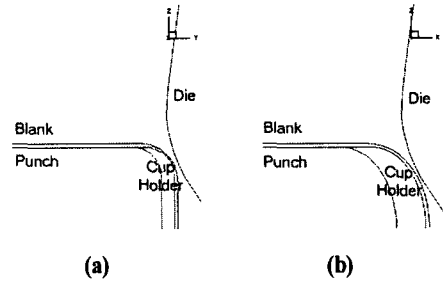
Initial shape of the tool positioning at the stage 3 with the modified design: (a) major axis; (b) minor axis
